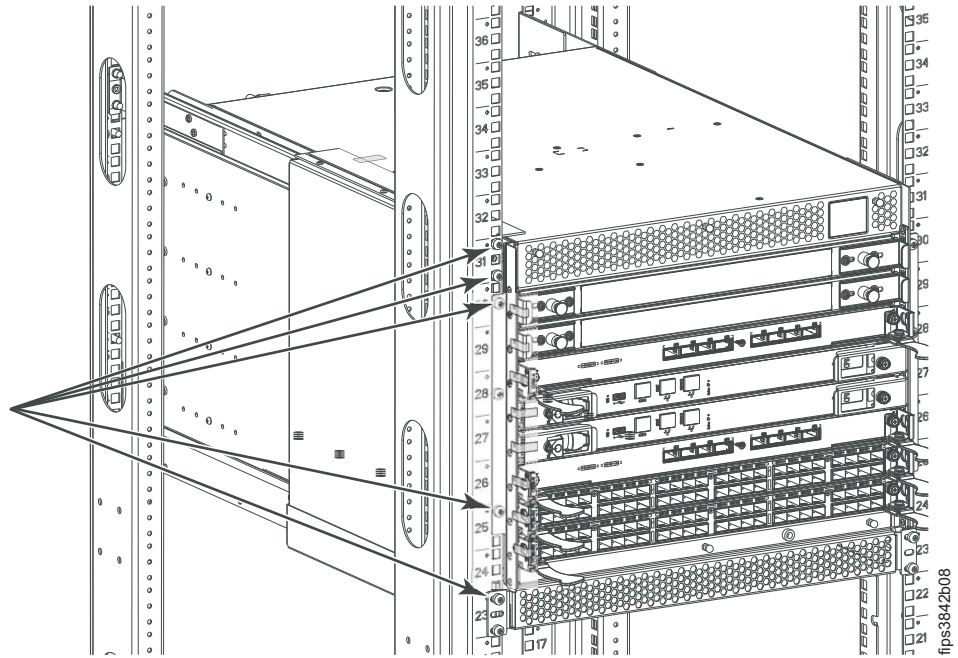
Five 2499-416 rackmount screws used for left side FIPS brackets (left port view)
